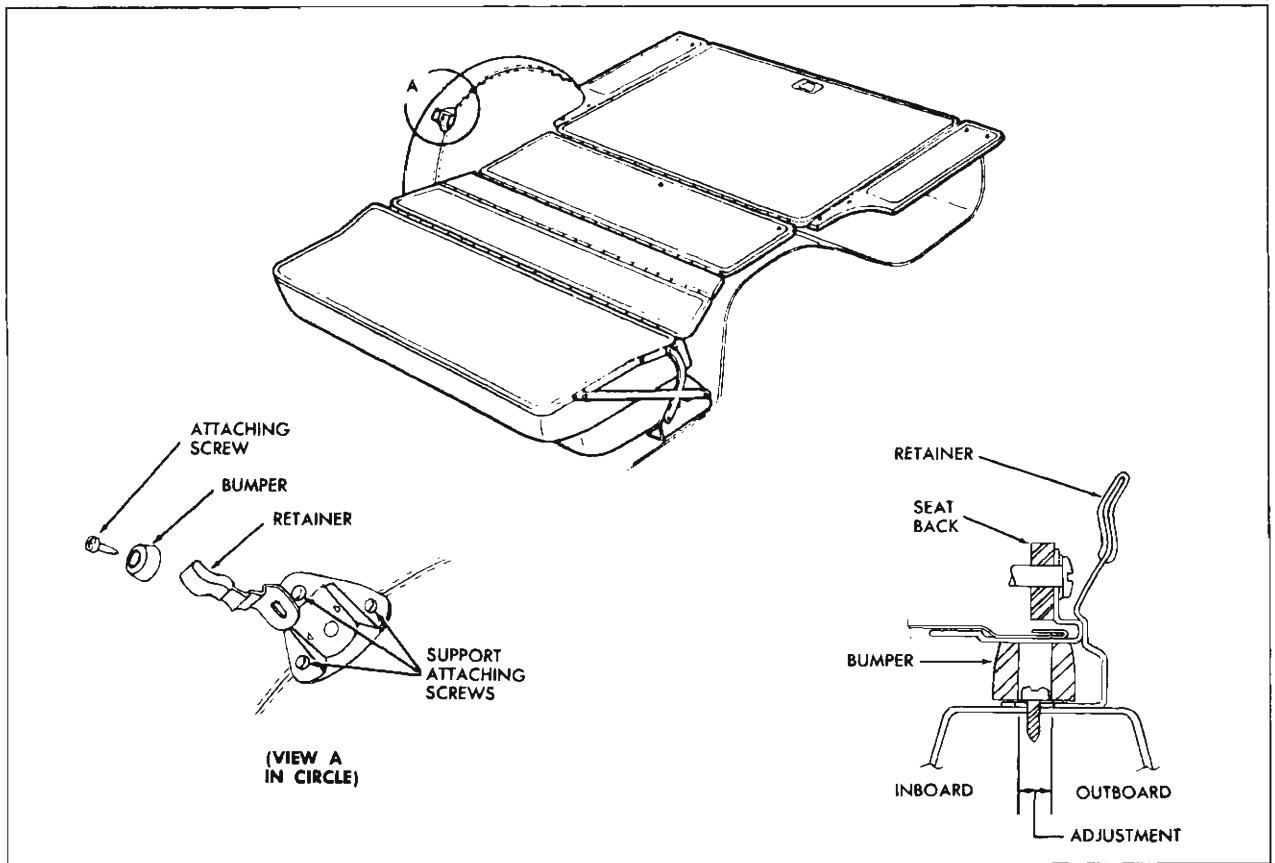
Folding Rear Seat Back Bumper, Retainer and Support
